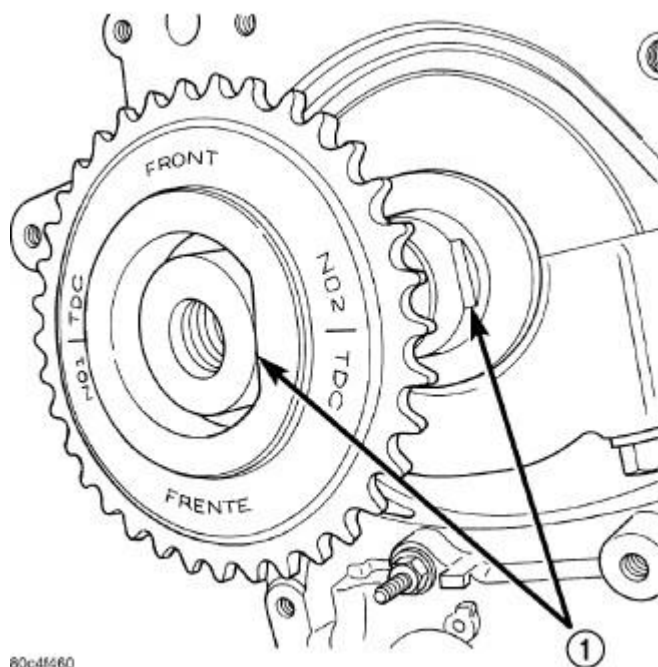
Balance Shaft Sprocket Alignment to Crankshaft
